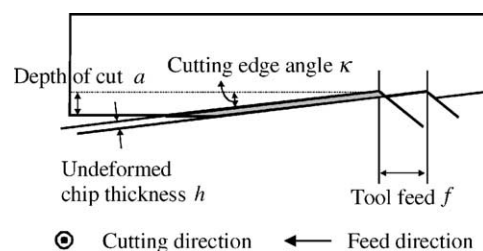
Schematic of the cutting model of a straight-nosed diamond tool [6].
